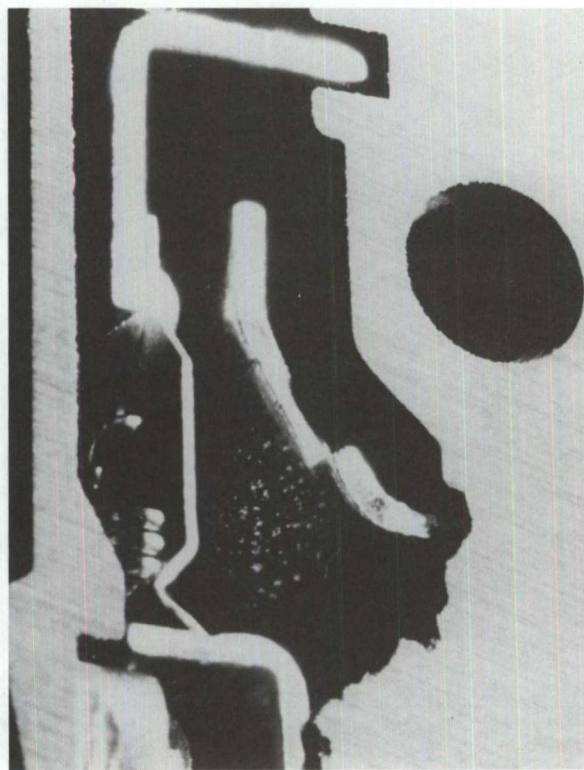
Detail of the microswitch mechanism showing the white specks deposited on the gold plated contact bar.
